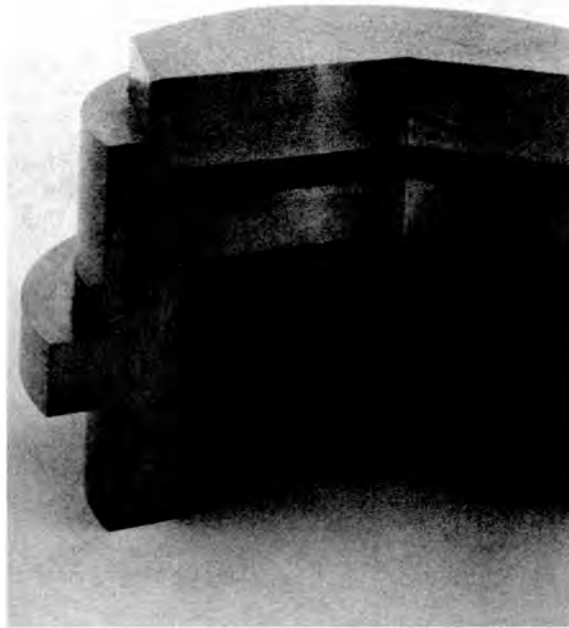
Cross Section of the Canister Showing Primary and Secondary Welds
